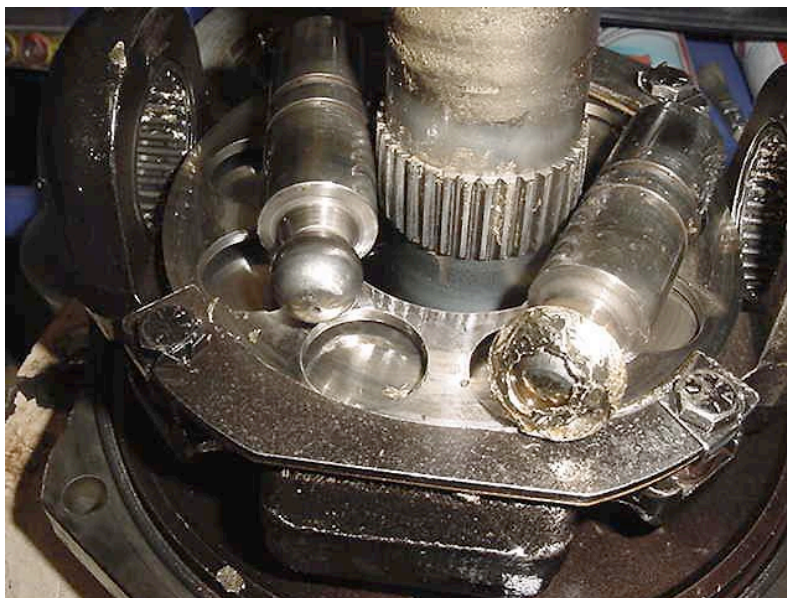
Failed NY Airbrake Axial-piston Fuel Pump
